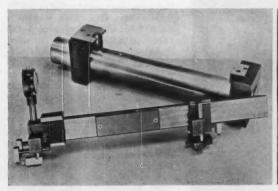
Inside or outside adjustable-diameter gage introduced by the Boice Mfg. Co.
